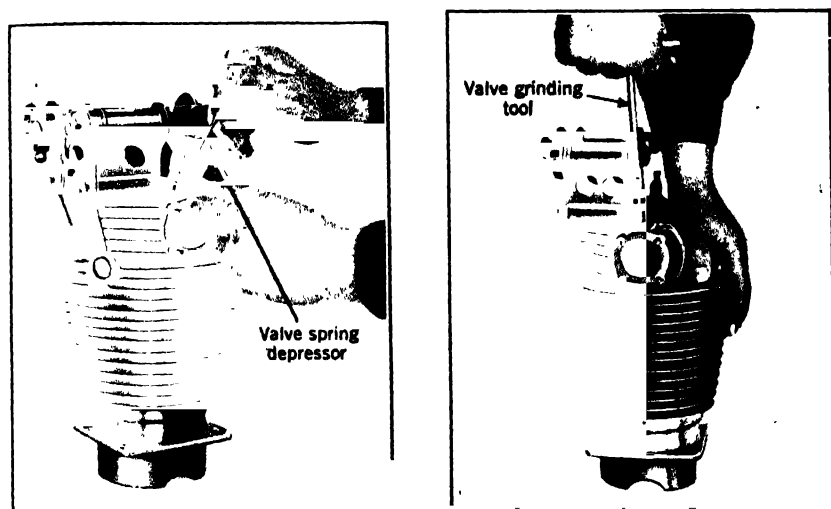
A Shows Method of Removing Valve Spring Retainer. B—Special Tool for Use in Valve Grinding.
